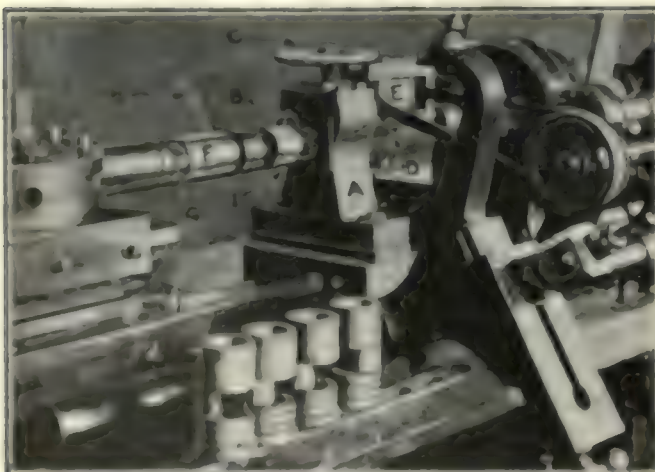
CUTTING OIL GROOVES IN BEARINGS
